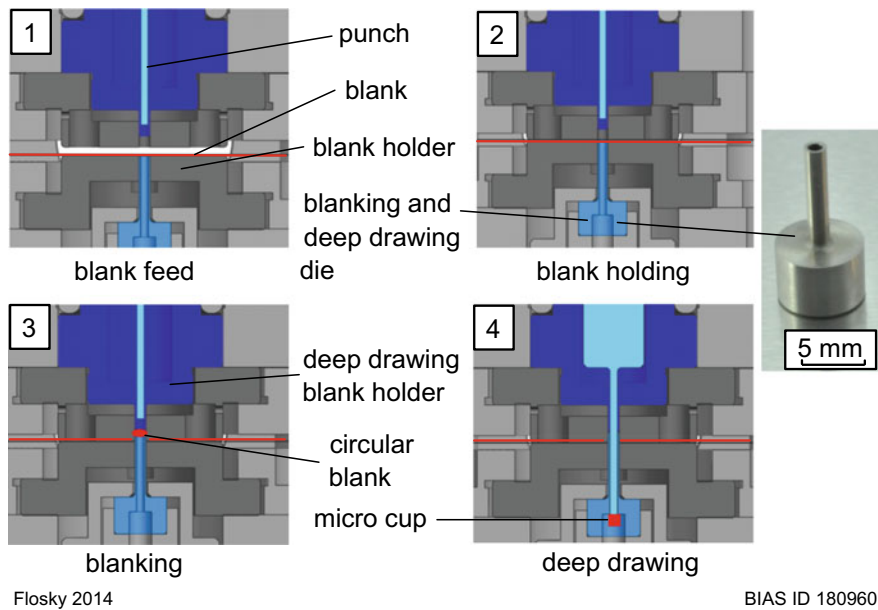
Production steps in a combined blanking and deep drawing process
